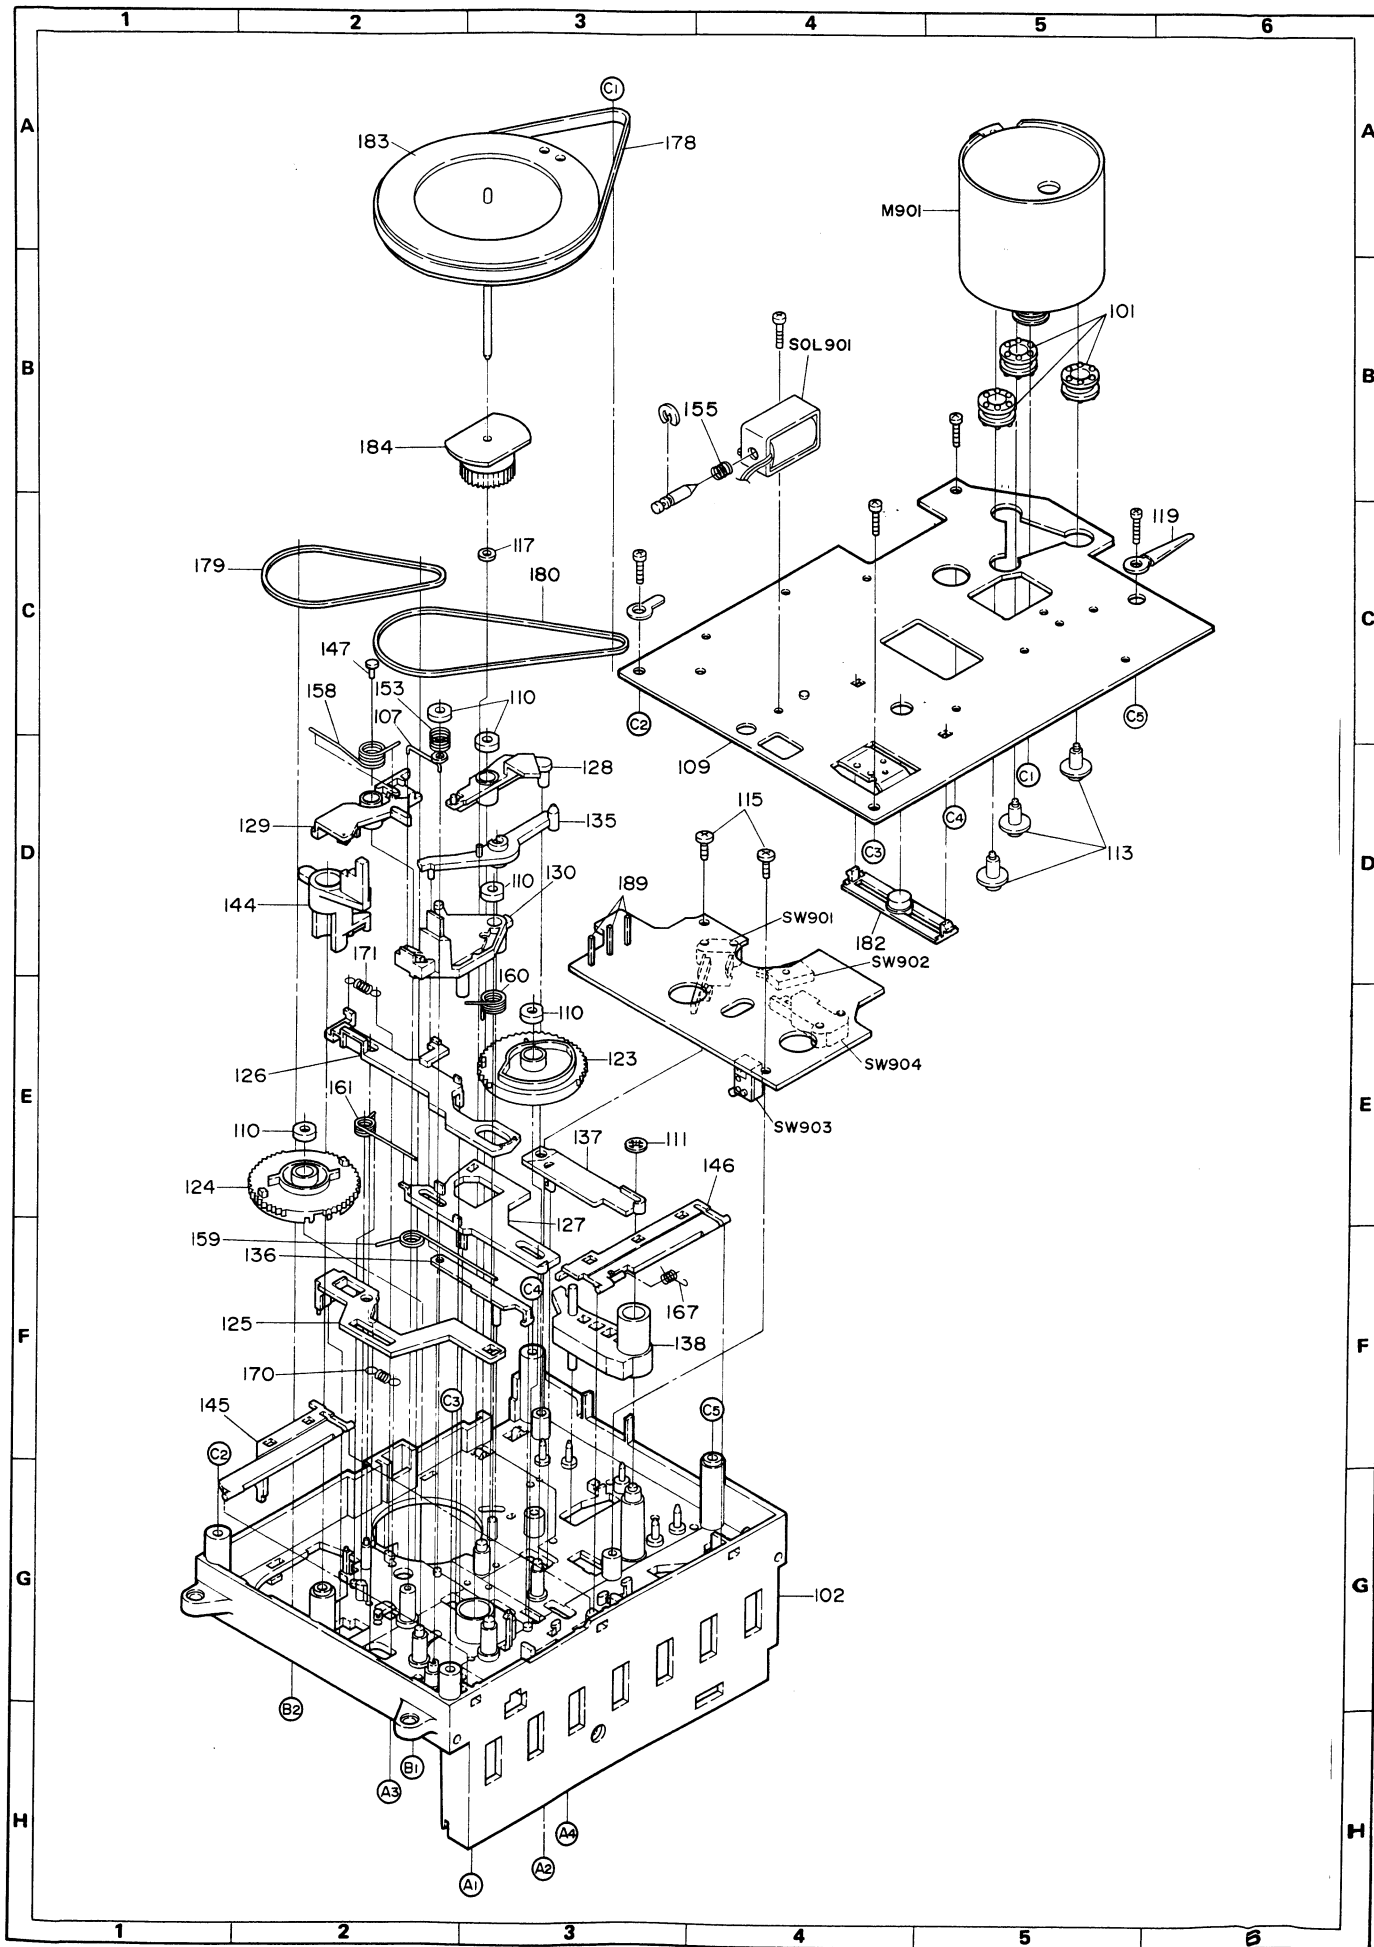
TAPE MECHANISM EXPLODED BOTTOM VIEW
